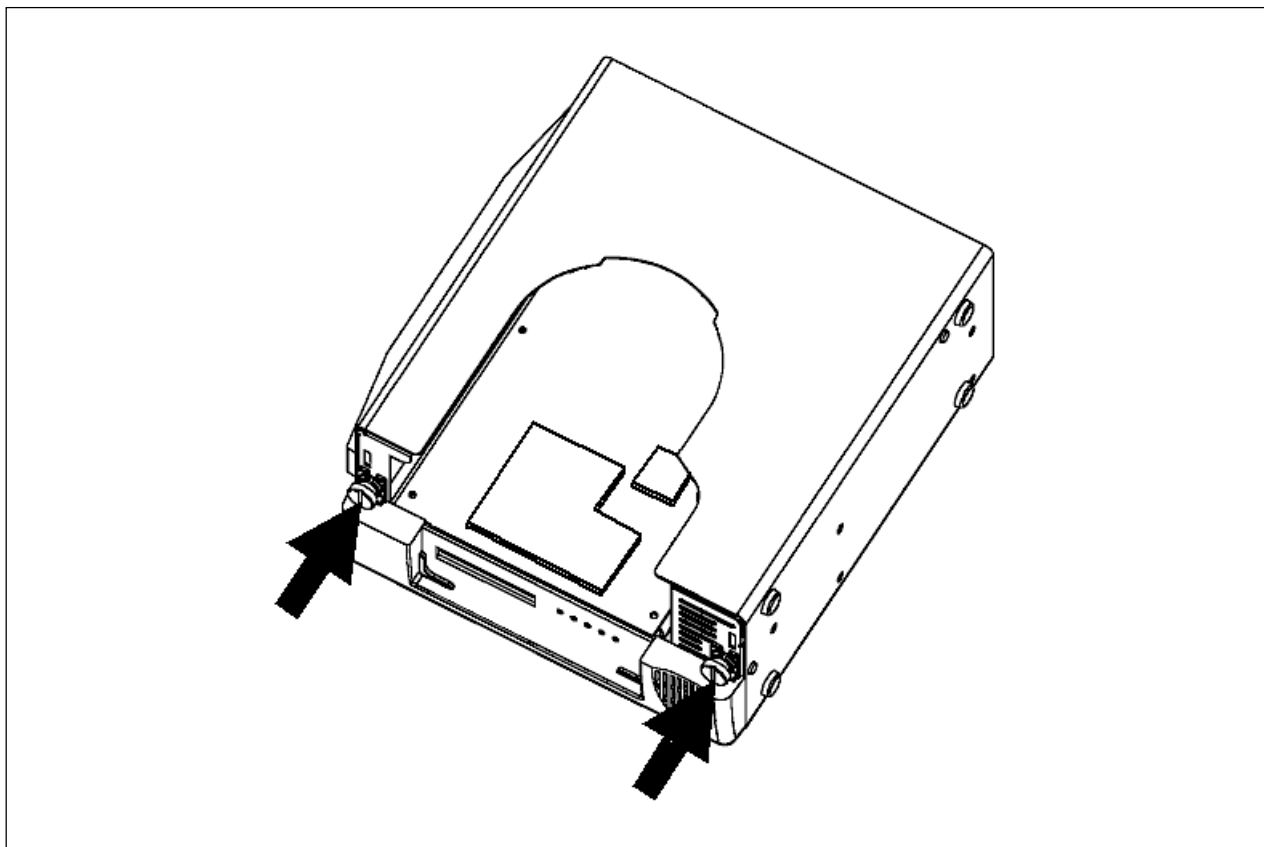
Opening/Closing Cover Step 1 (After Removing Front Cover 1)
